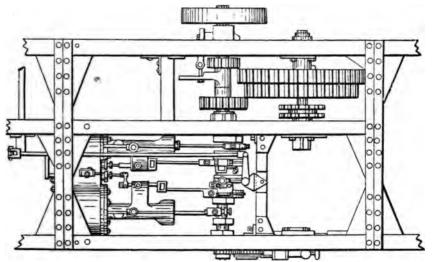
Straker heavy-freight steam vehicles. Plan view of engine and running gear with covers removed.
